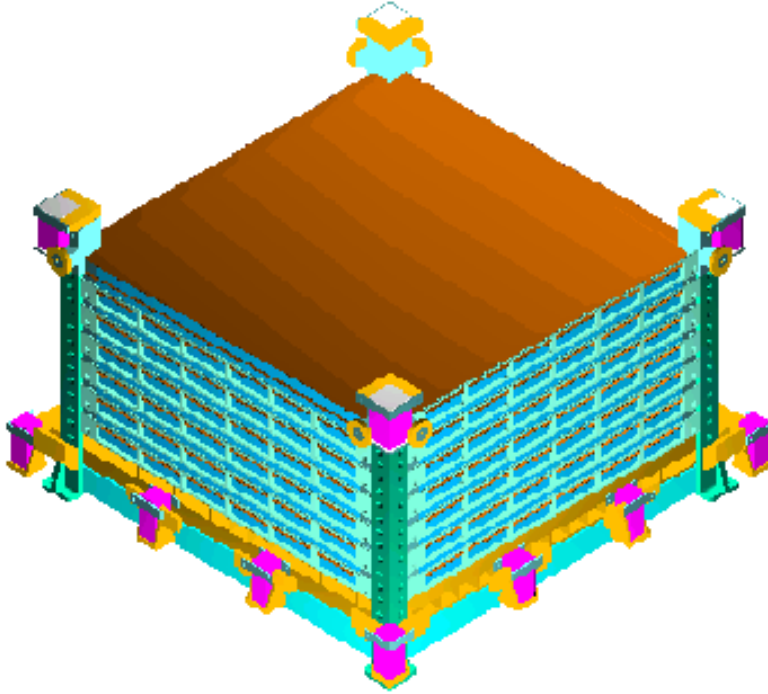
Schematic view of the Silicon Tracker assembly.
